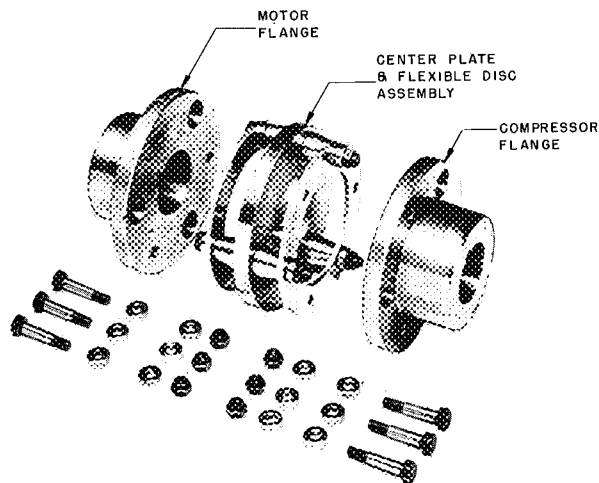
DISMANTLED COUPLING READY FOR ASSEMBLY TO COMPRESSOR AND MOTOR
